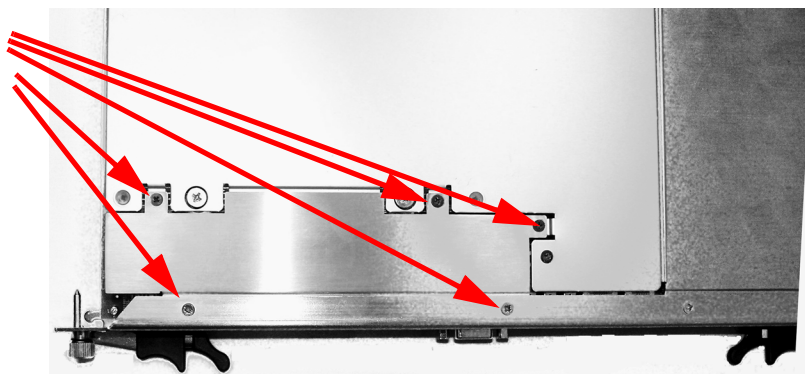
M9536A Disassembly for adding memory. Use a #1 Phillips screwdriver to remove and replace screws.
